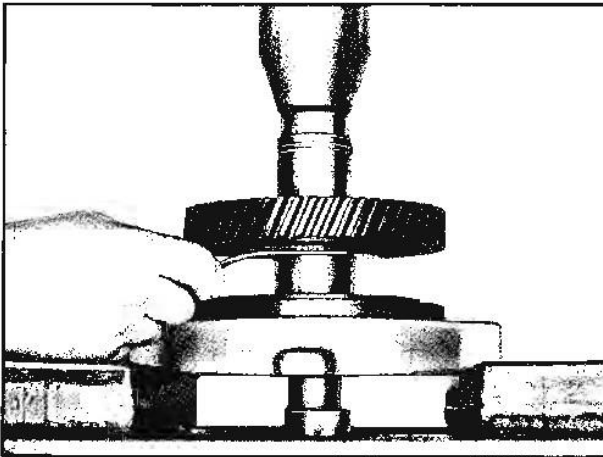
Installing Camshaft Timing Gear and Checking Thrust Plate End Clearance
